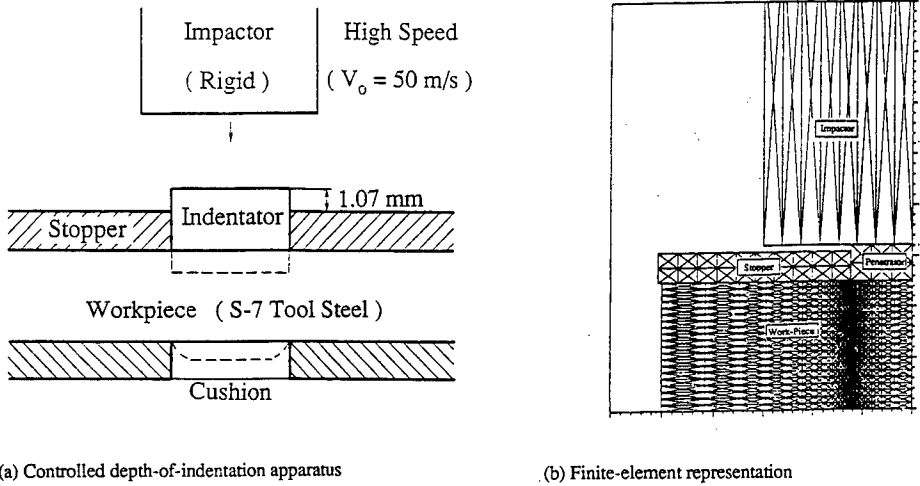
Initial geometry and mesh assembly of the high speed forming process
